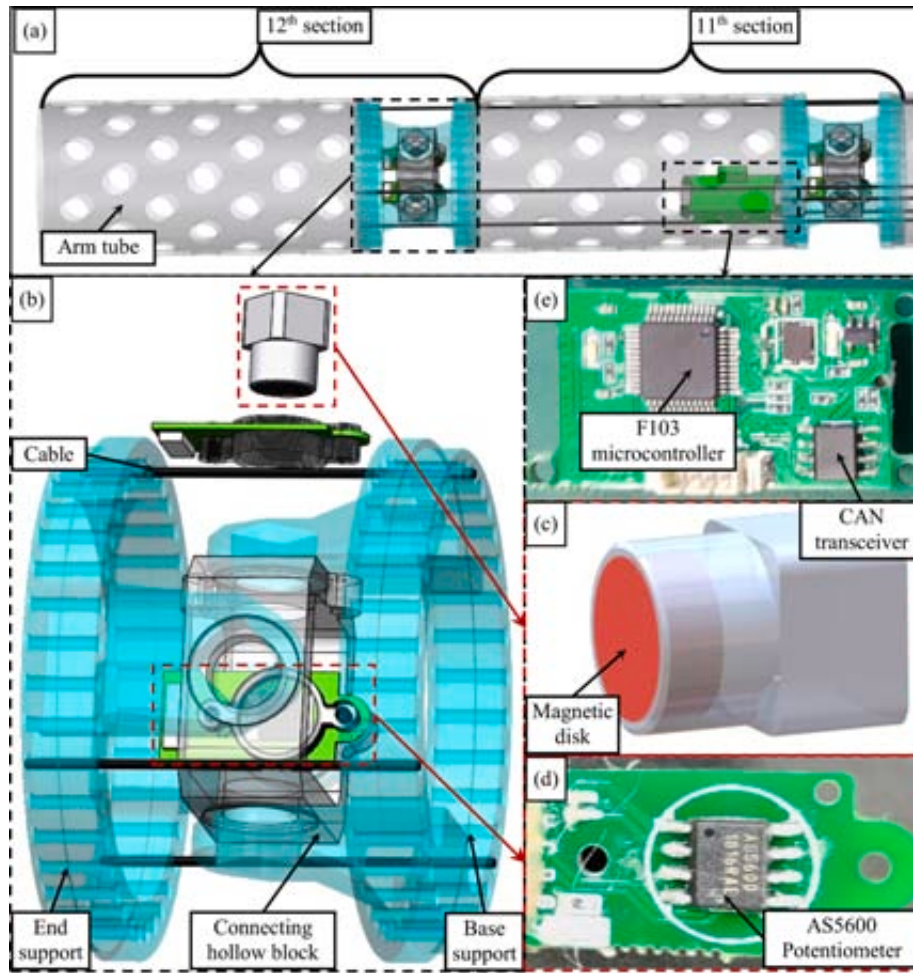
Design of the snake arm: (a) the distal two sections; (b) structure of a universal joint; (c) the hollow connecting shaft with a magnet disk; (d) the AS5600 sensor board; and (e) the F103 acquisition board.
